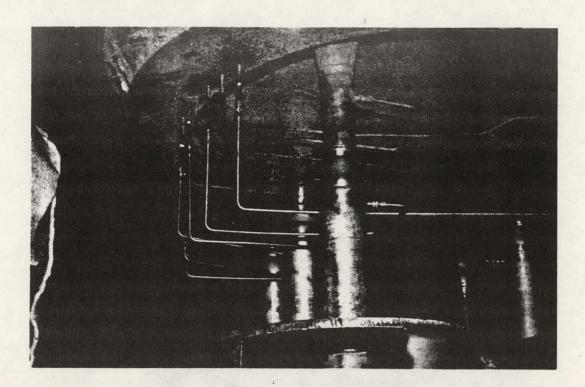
Photograph Showing Attachment of New Cylindrical GBF Elements to Existing Dish Head Support Plate
